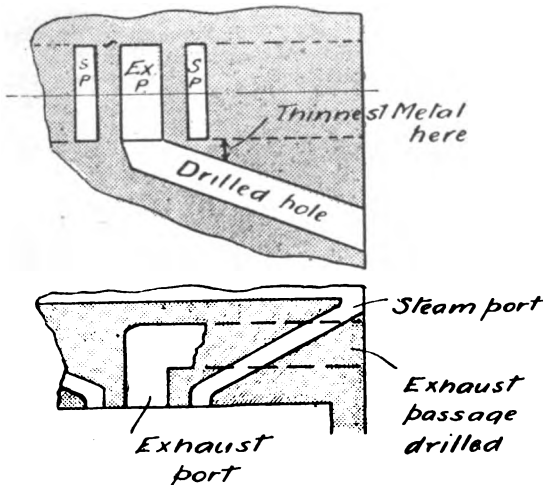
SHOWING METHOD OF FORMING EXHAUST PASSAGE.
